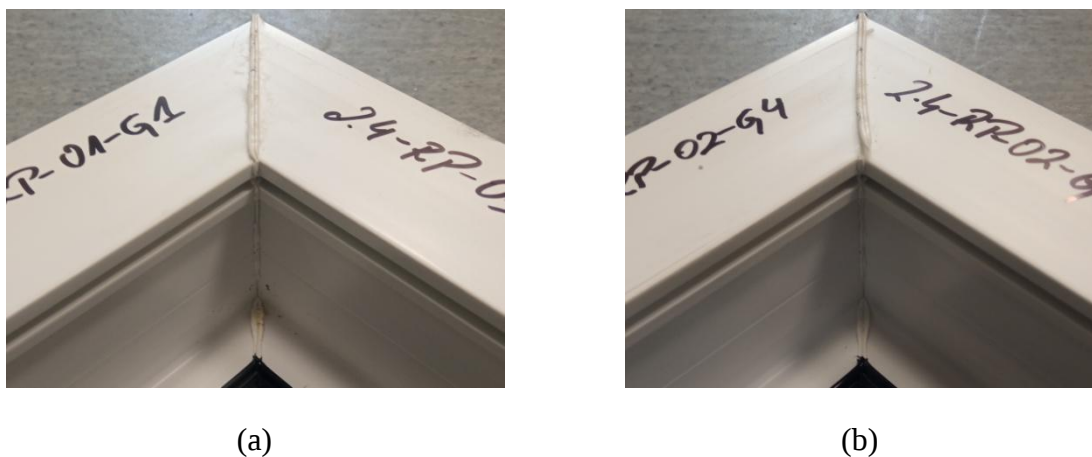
Selected welds from test specimens produced with composite milling to a depth of 2 mm: (a) welded using head 1, (b) welded using head 4 [13]
